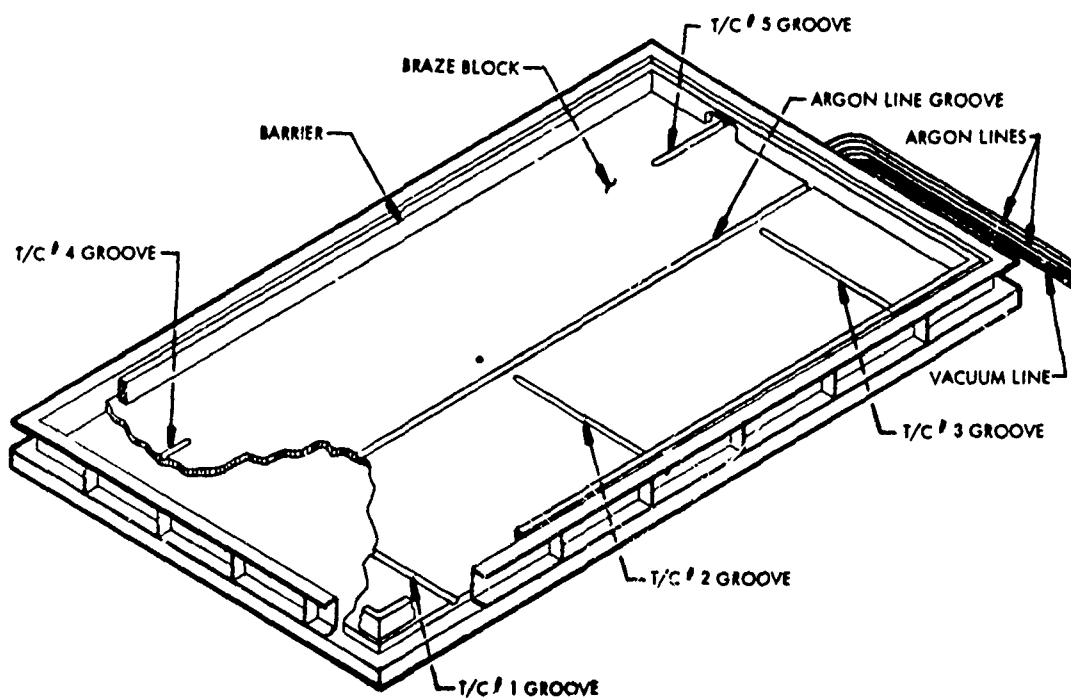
BRAZE BOX TOOLING ILLUSTRATING THERMOCOUPLE LOCATIONS
